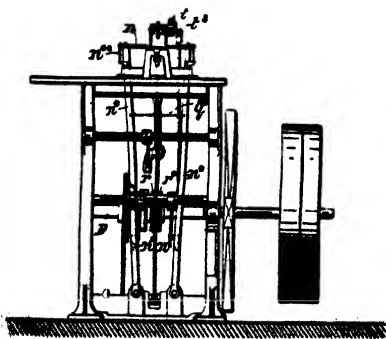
Tea Packing and Parcelling Machine (end elevation of folding and discharging device).
